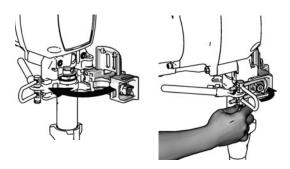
Rotate pump to align with material hose. Connect material hose and hand tighten to 70 in-lb
